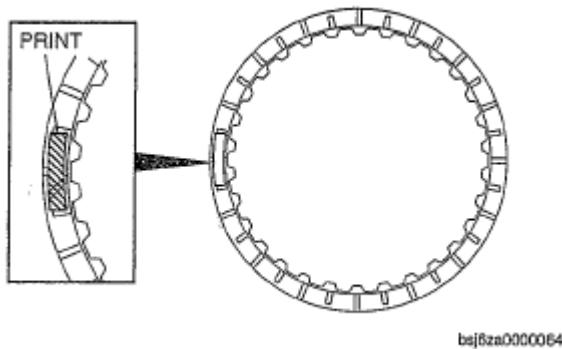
Identifying O-Ring On C2, C3 Clutch Drum
